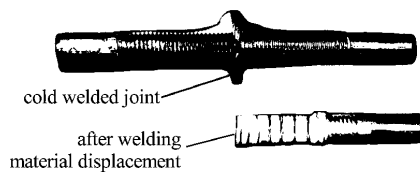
Images of butt-cold welded bars and of the deformed copper wires
